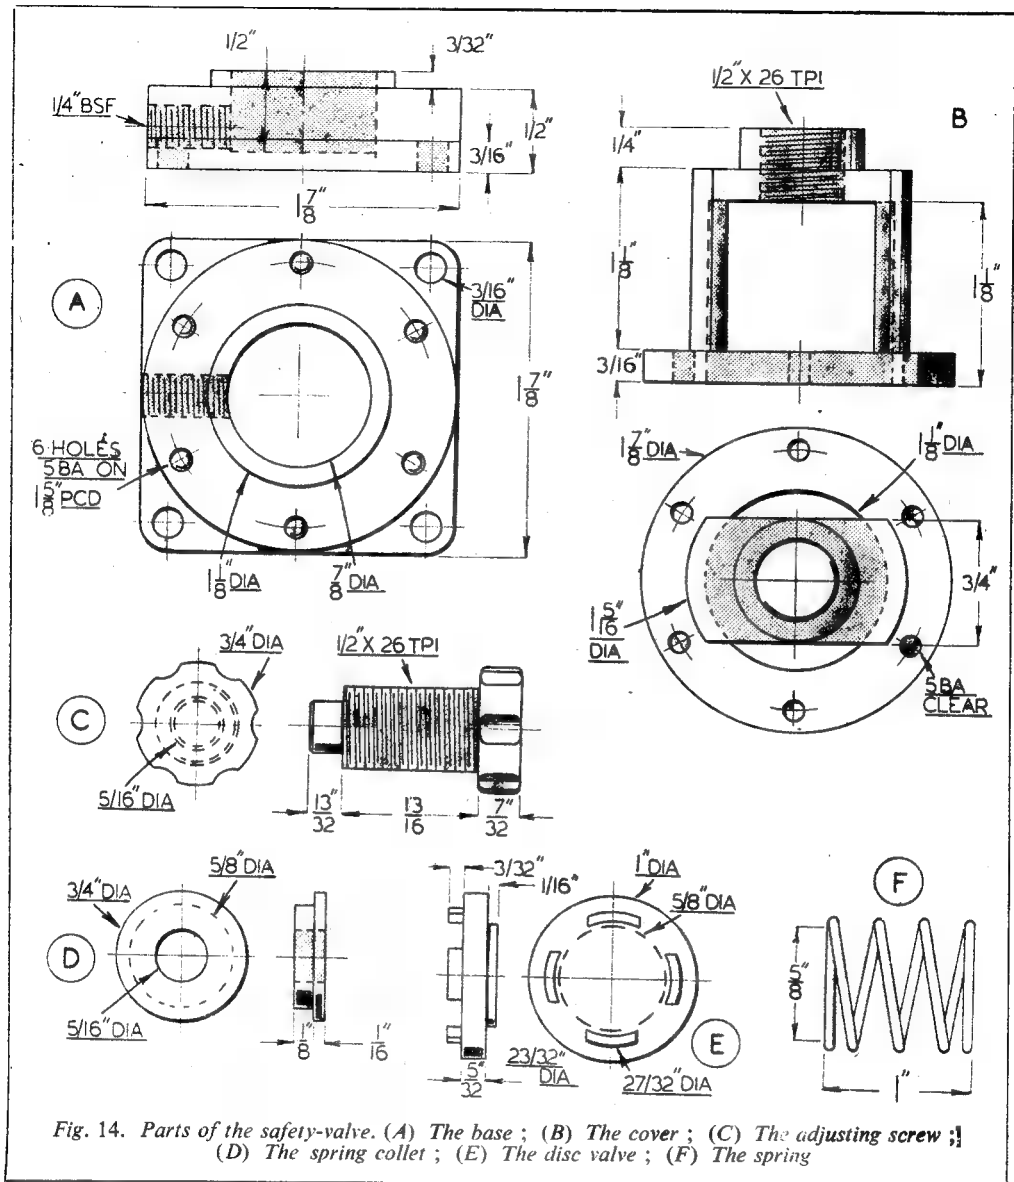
Parts of the safety-valve. (A) The base ; (B) The cover ; (C) The adjusting screw ; (D) The spring collar ; (E) The disc valve ; (F) The spring
